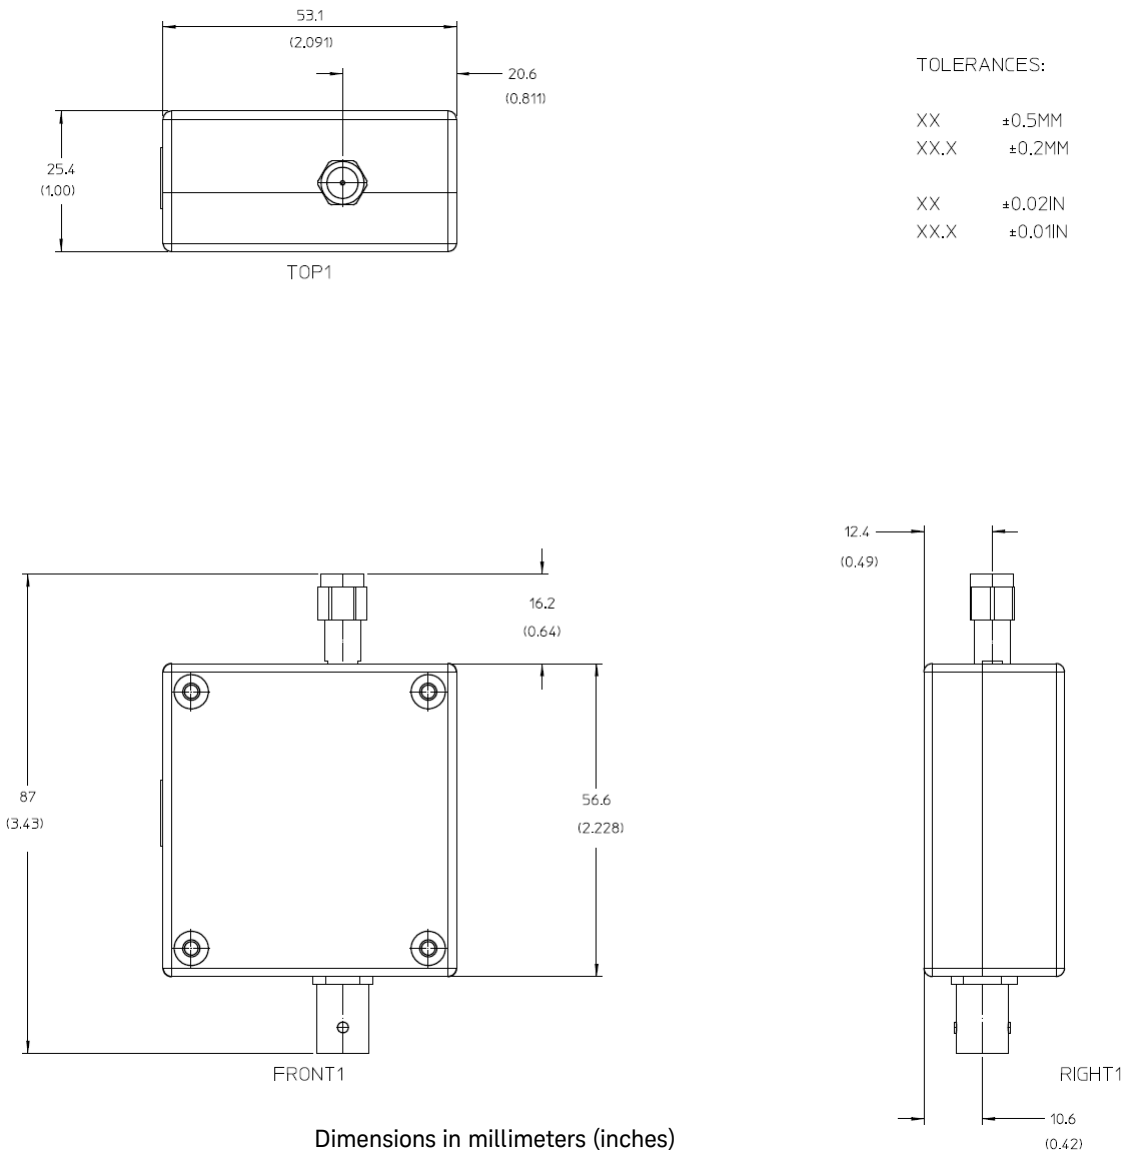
Dimensions of the U9391-60009 squaring circuit
